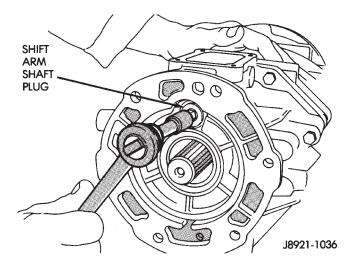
Removing/Installing Shift Lever Shaft Plug
